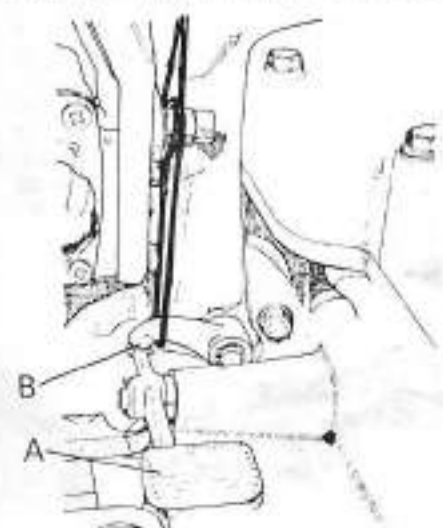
To retain locking sleeve in differential end plate, thus allowing removal or installation of final drive unit, depress pedal (A) to engage differential lock and wire arm (B) in engaged position.
